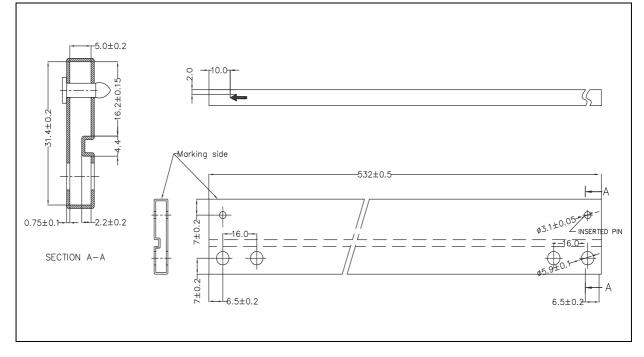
Drawing dimension tube for TO-220 Dual Gauge (mm.)
